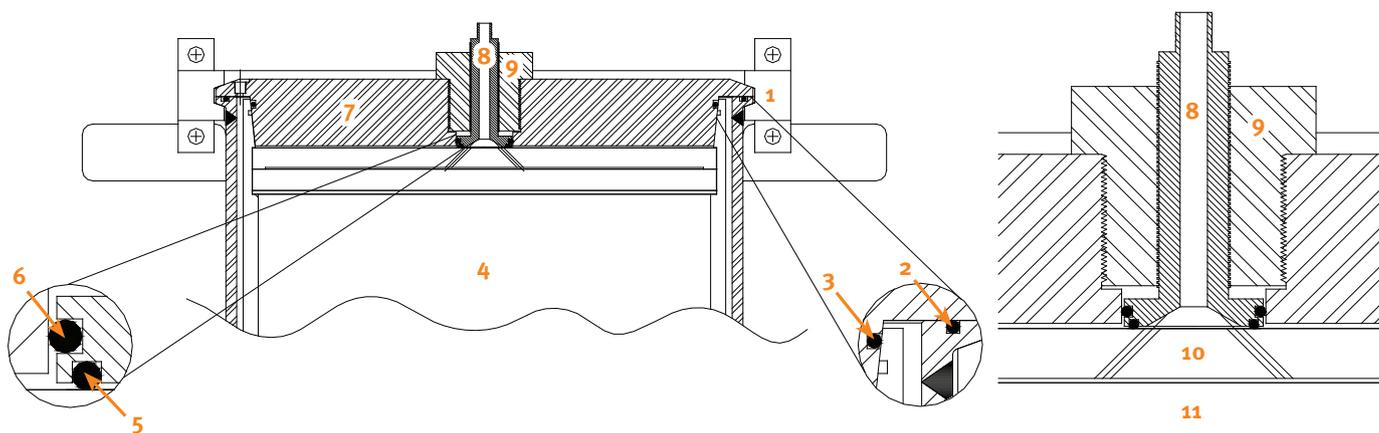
Cut-away view of the top head assembly (left) and expanded view of the cartridge seal adapter (right). 1 = top head clamp, 2 = O-ring "D" size 387, Viton (as shipped) or EPDM (spares), 3 = O-ring "C" size 460, Viton (as shipped) or EPDM (spares), 4 = cartridge, 5 = O-ring "A" size 222, Chemraz, 6 = O-ring "B" size 223, Chemraz, 7 = top head assembly, 8 = cartridge seal adapter (adjustable), 9 = seal adapter housing (fixed), 10 = flow distribution plate (inside the cartridge), and 11 = frit.
